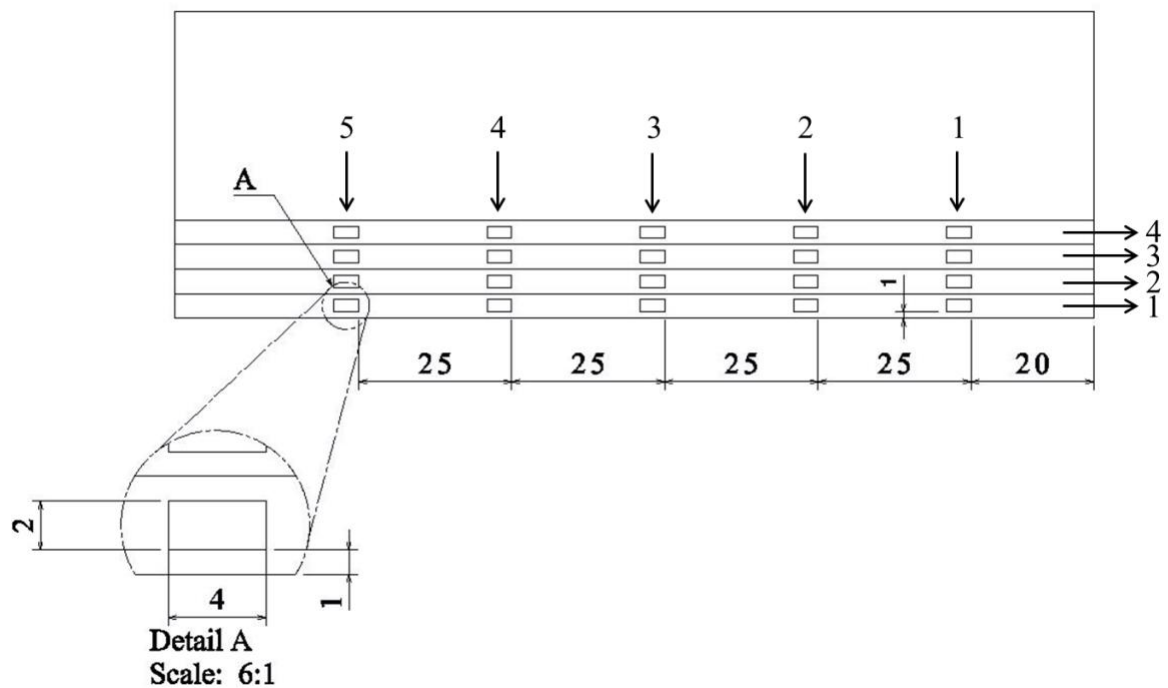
Surface roughness measurement procedure for each machining pass (rows 1 to 4) and the dimensions of the sampling rectangle (detail A)
